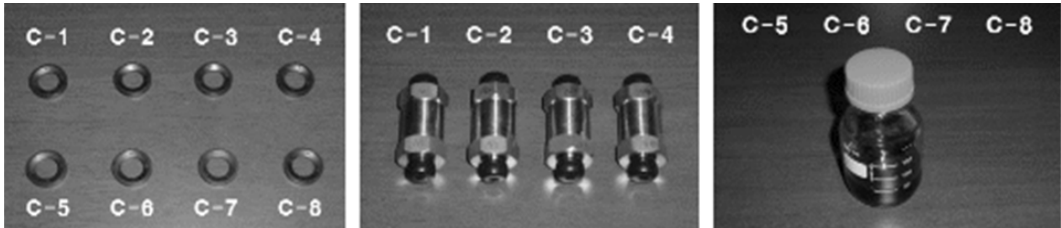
Photographs of check valve seals w/o (C-1~4) and w/ (C-5~8) oil immersion.
